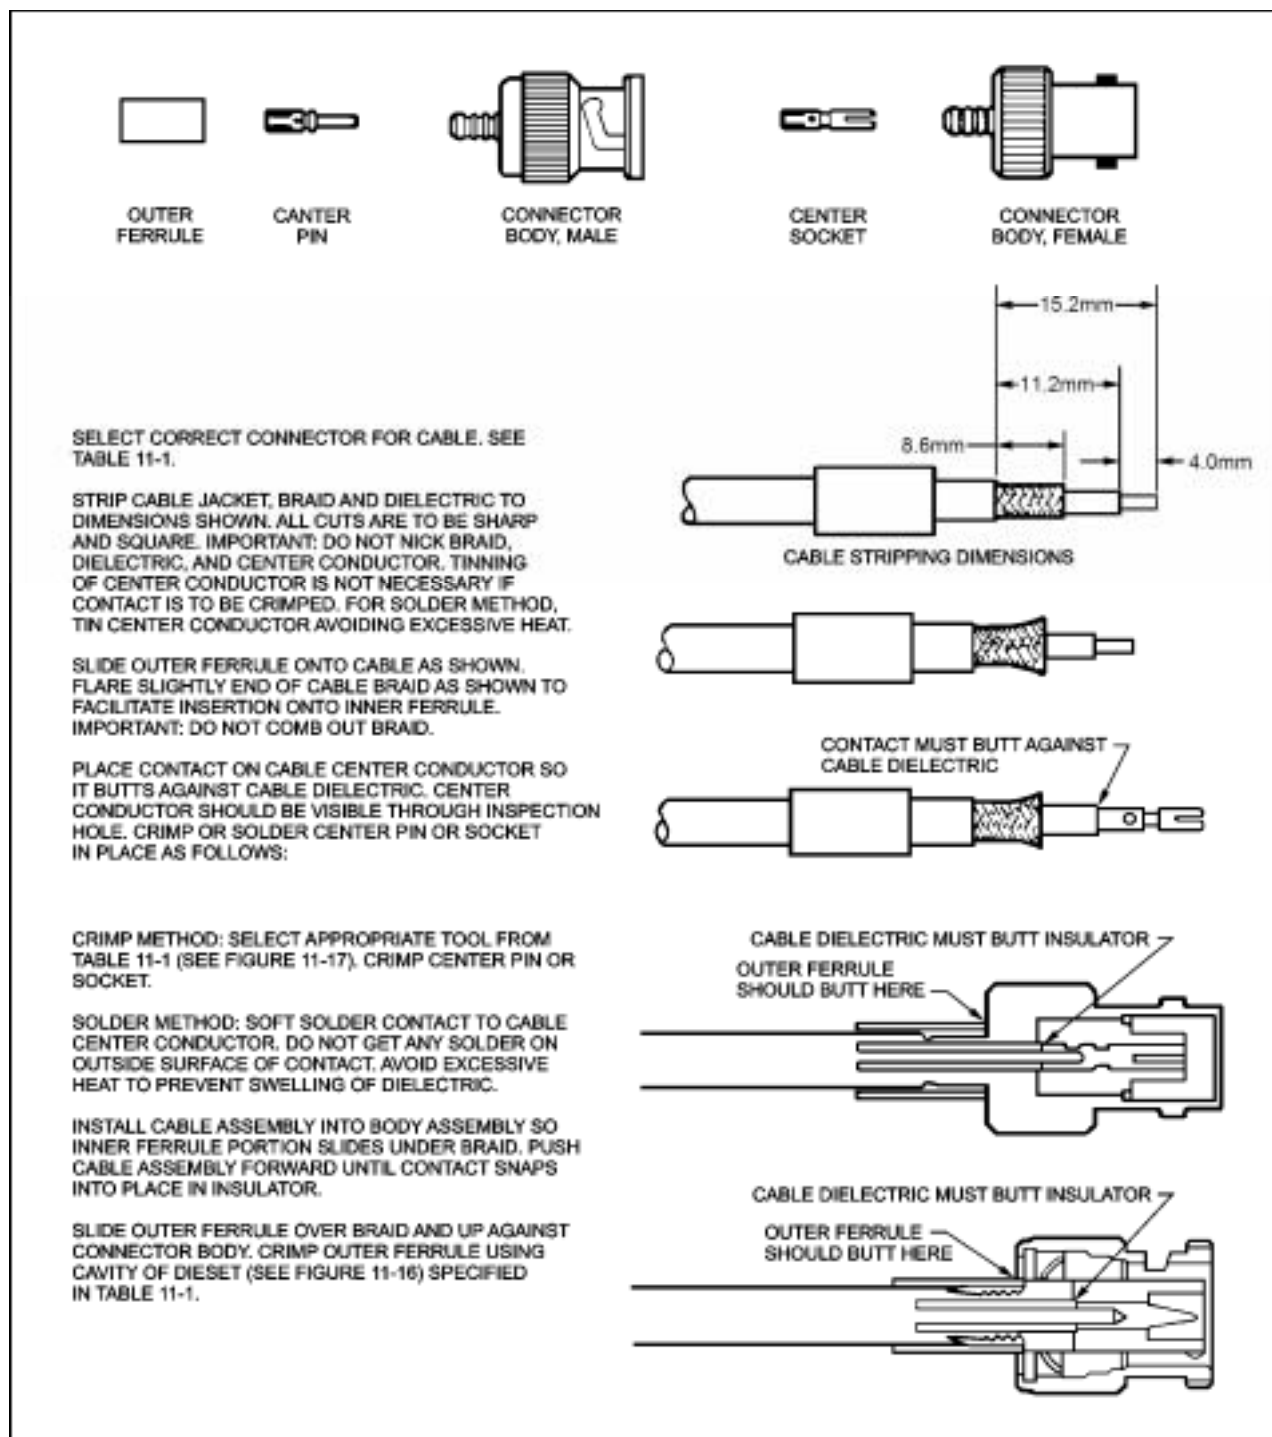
Attaching BNC & TNC (M39012) Crimp Connectors to Coaxial Cable
